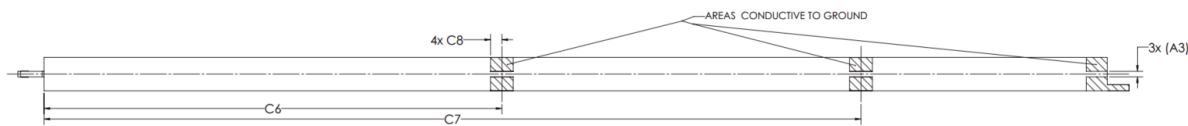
BOTTOM SIDE OF 1U LONG
